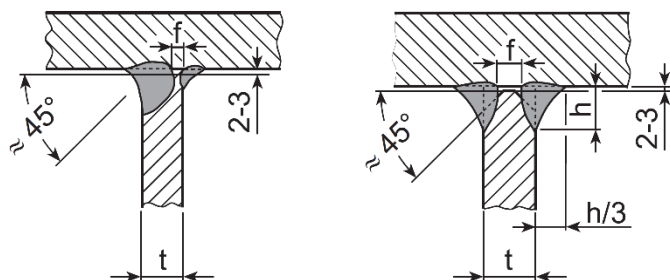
Single- and double-bevel welds with defined incomplete root penetration
